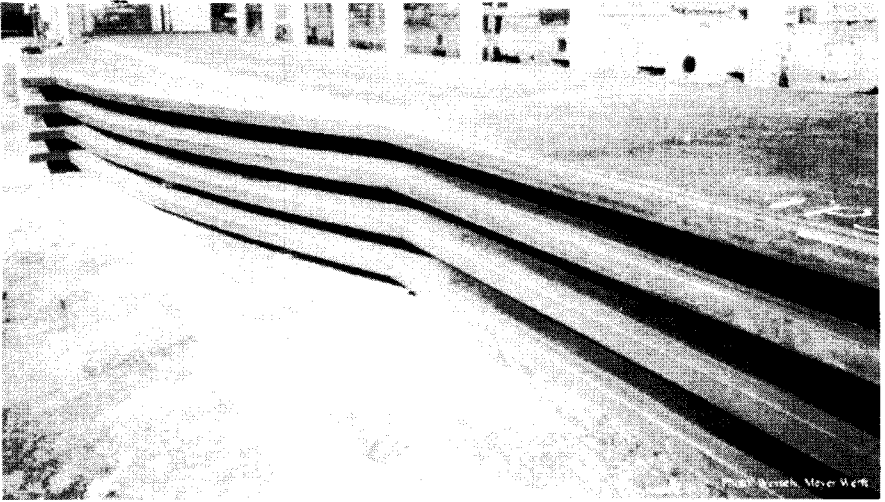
Actual applications of laser welded sandwich panels as staircase landings
